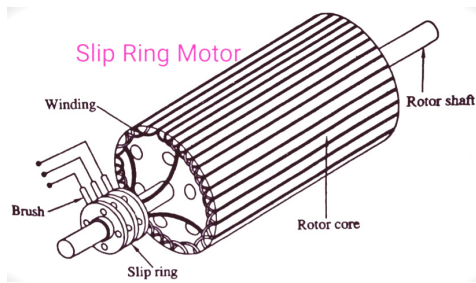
Cut-away view of wound rotor motor with slip rings. (Source: www.intechopen.com/chapters/73820)
